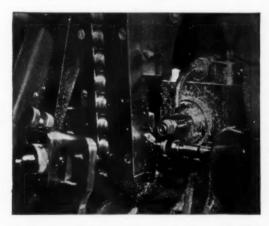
Barber-Colman Type "S" hobbing machines are among machines used by Ford for roughing the small gears.
